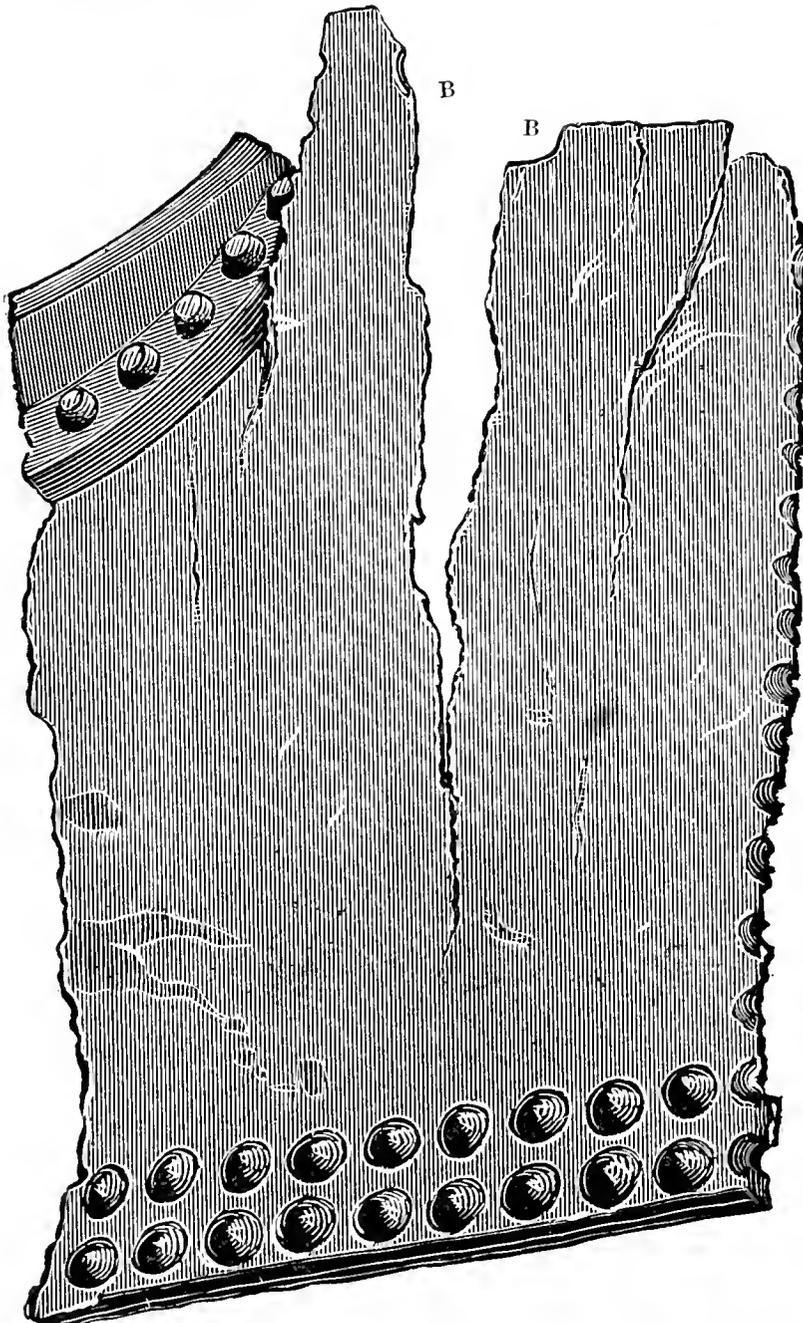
Part of the middle course of plates, boiler No. 3, showing broken manhole frame which struck and fractured boiler No. 2, splitting itself. Also showing at B B parts of the tapped hole through which the dregs pipe entered the boiler, as shown at B, Fig. 1.
